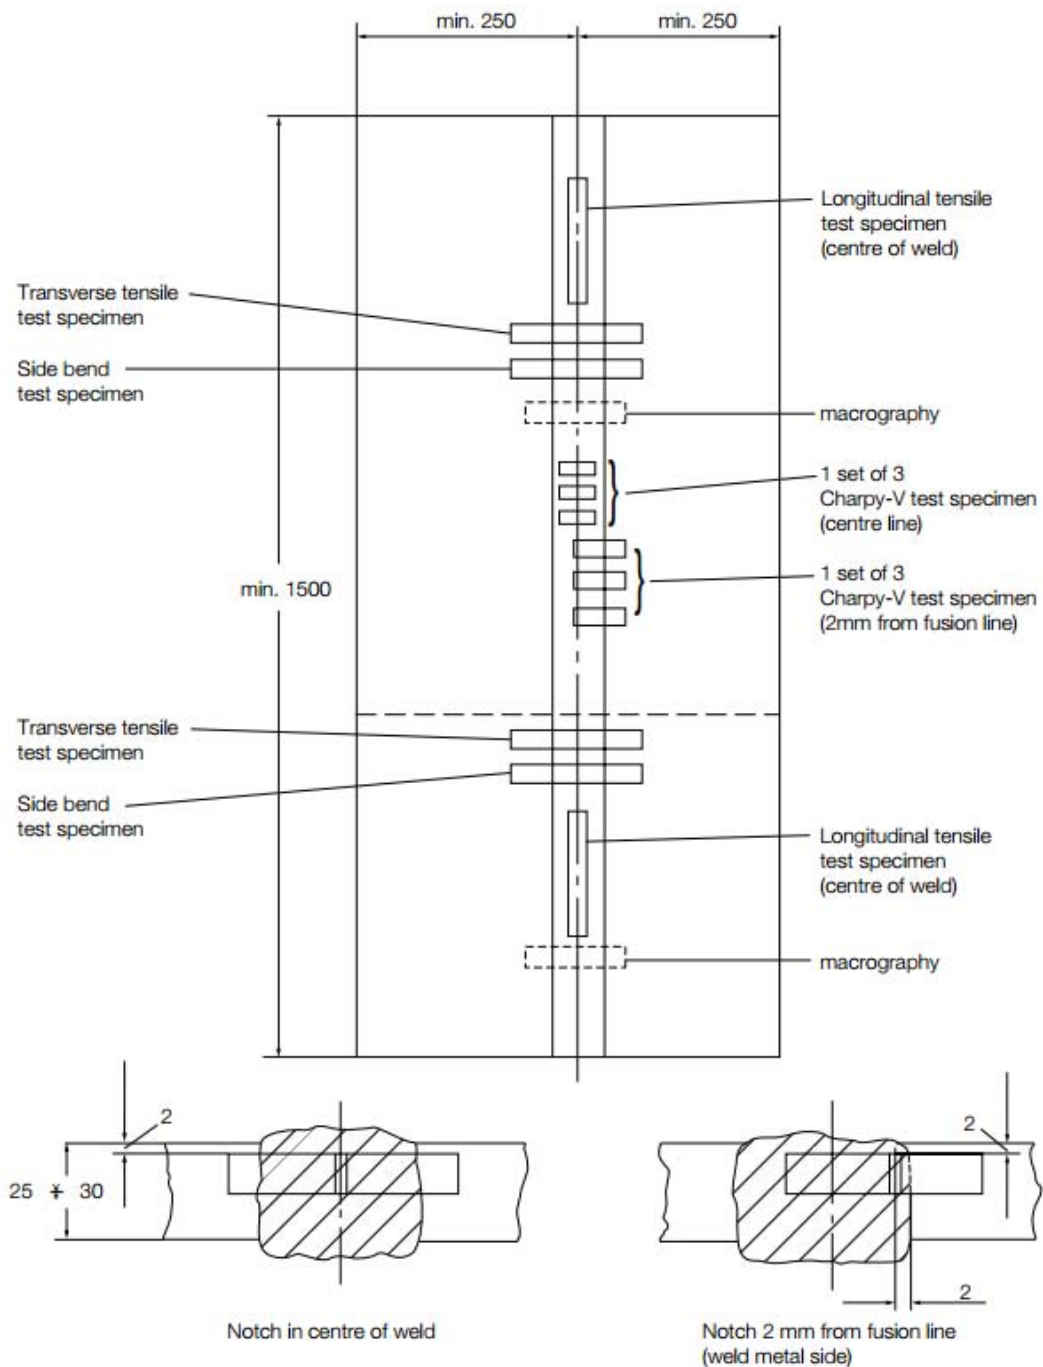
Electroslag and electrode gas butt weld test assembly
